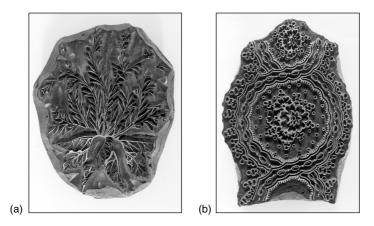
Wood blocks with (a) brass strip and pin inserts, (b) a cast type-metal printing surface (without pitch pins)
